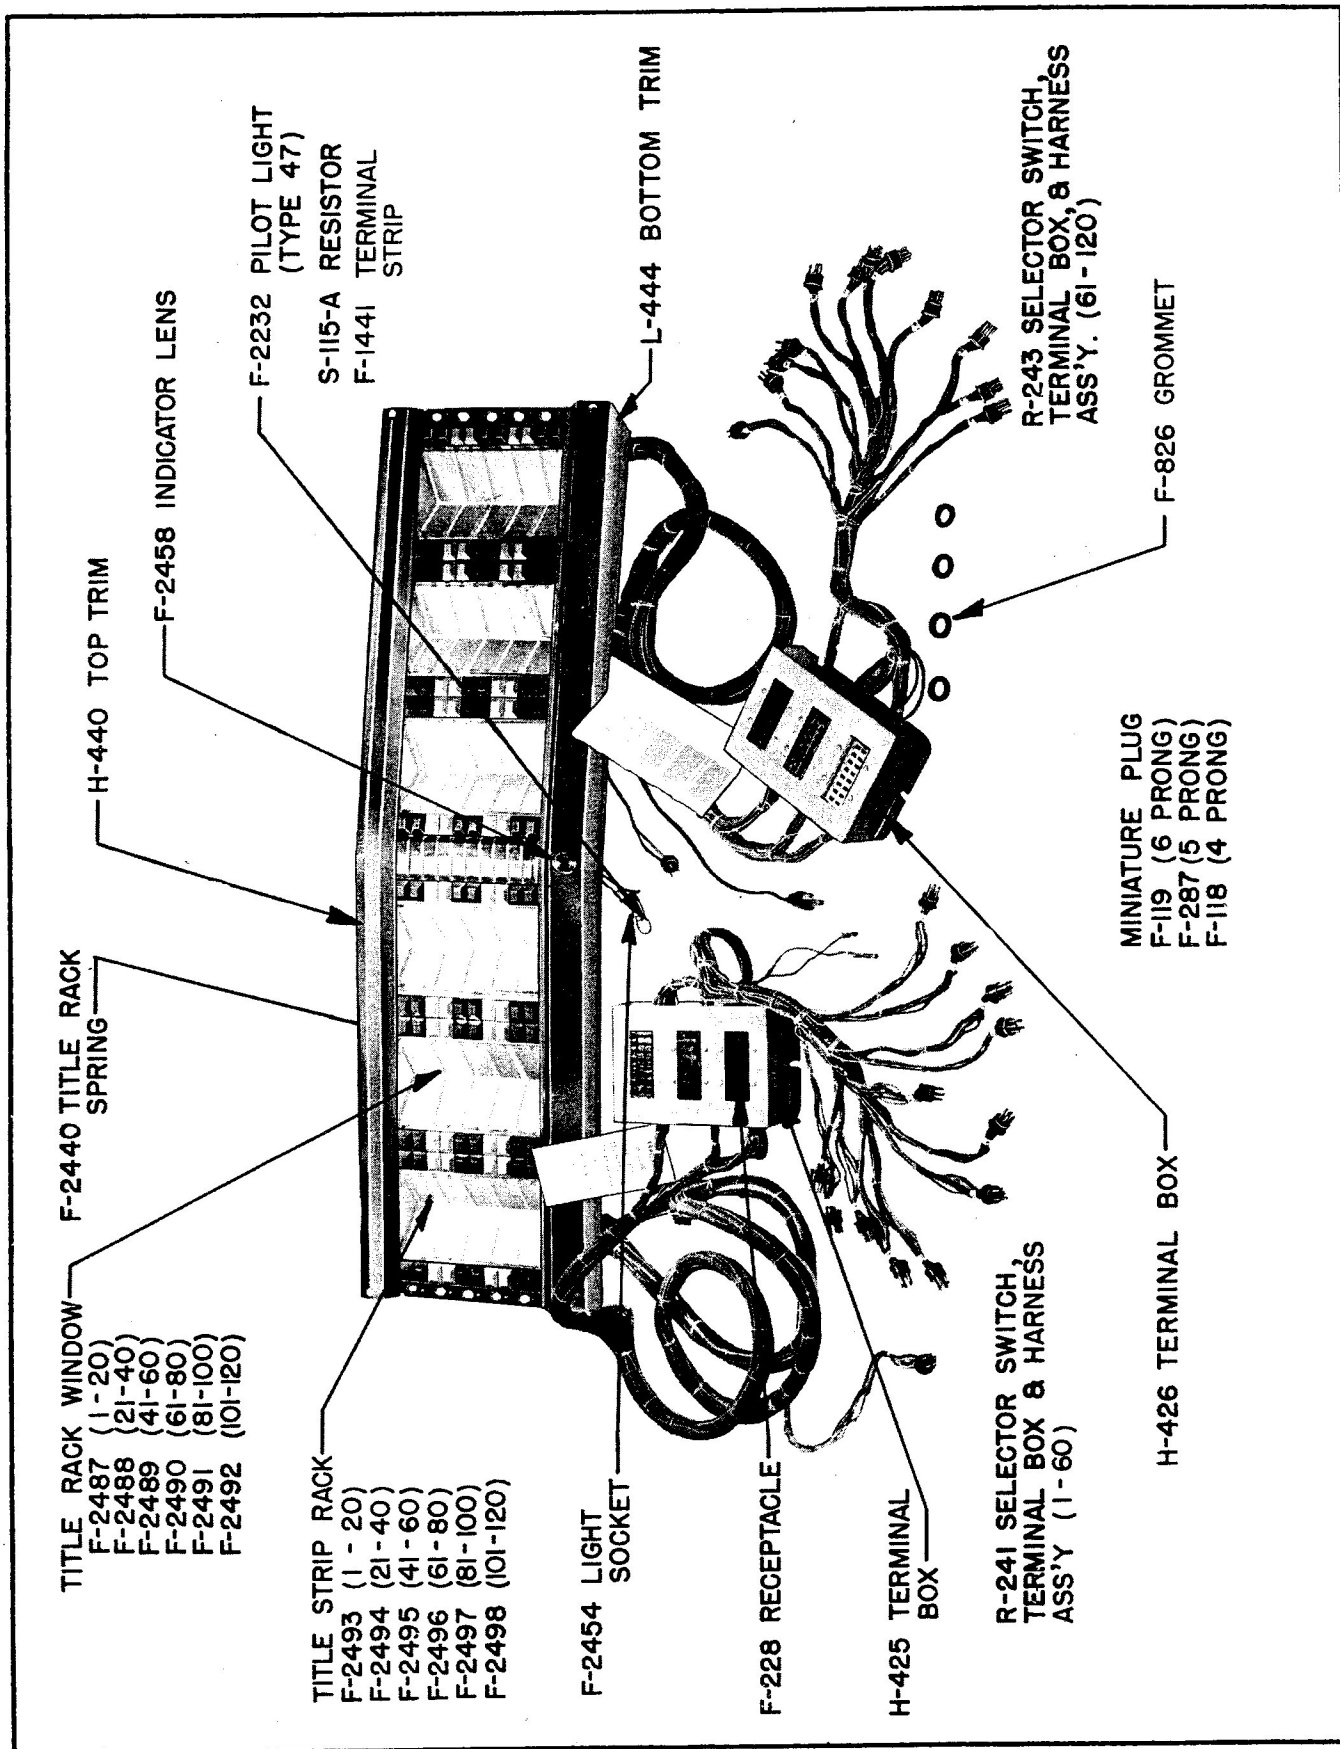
SELECTOR PANEL ASSEMBLY, MODEL E-120
